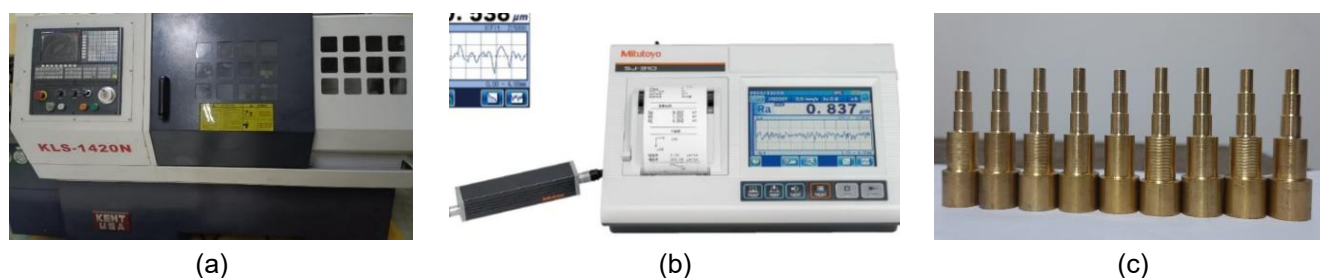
Experimental setup and measurement equipment: (a) CNC turning machine (GSK 980TDi), (b) surface roughness tester (Mitutoyo SJ-310), and (c) machined test specimens
